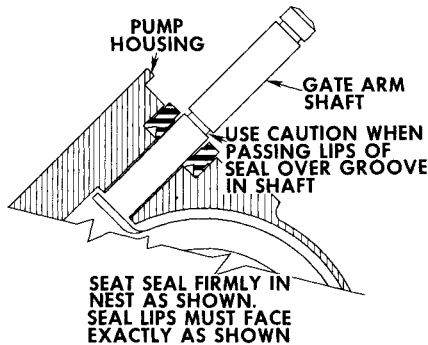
Installing Lip Seal On Gate Arm Shaft
